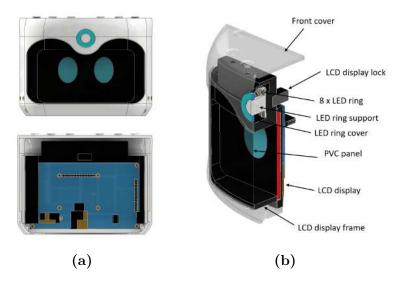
Details of the head front panel: (a) Front and back views, (b) Cut view.
